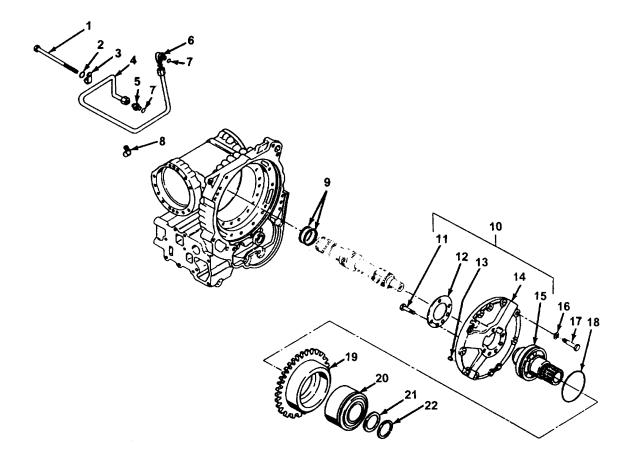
Oil Transfer Diaphragm and Input Pump Drive Gear.
